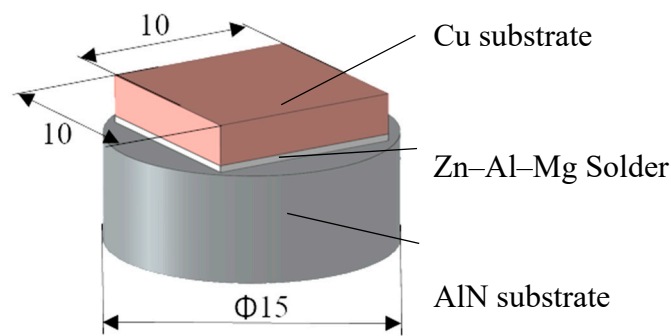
Specimen for shear testing the Cu/Zn-Al-Mg/AlN joint. Unit: mm.
